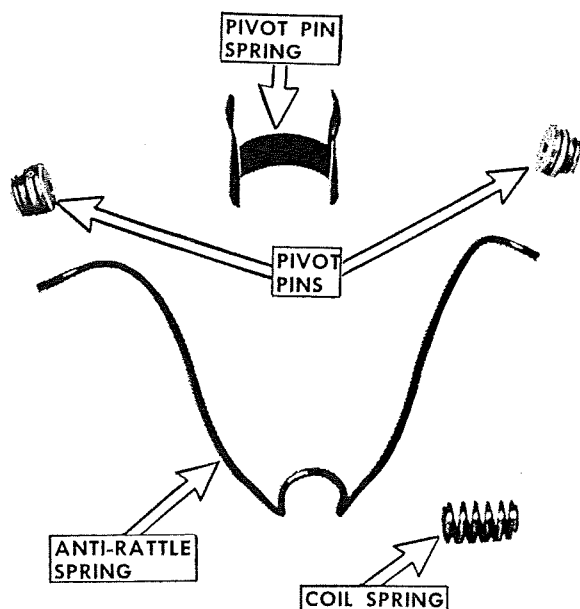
Chevrolet 1940-42. Gearshift Lever Parts
